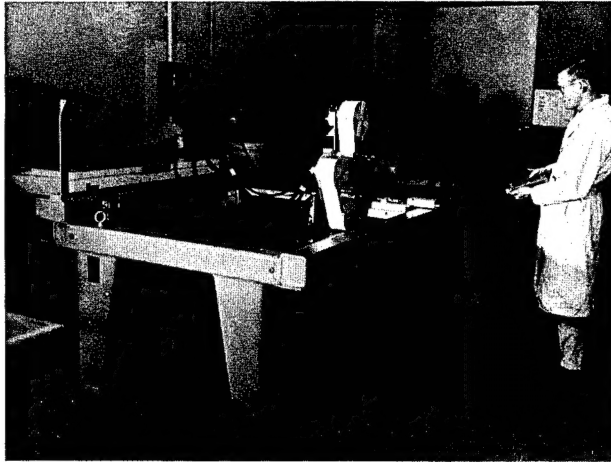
AUTOMATIC TAPE LAYUP MACHINE
